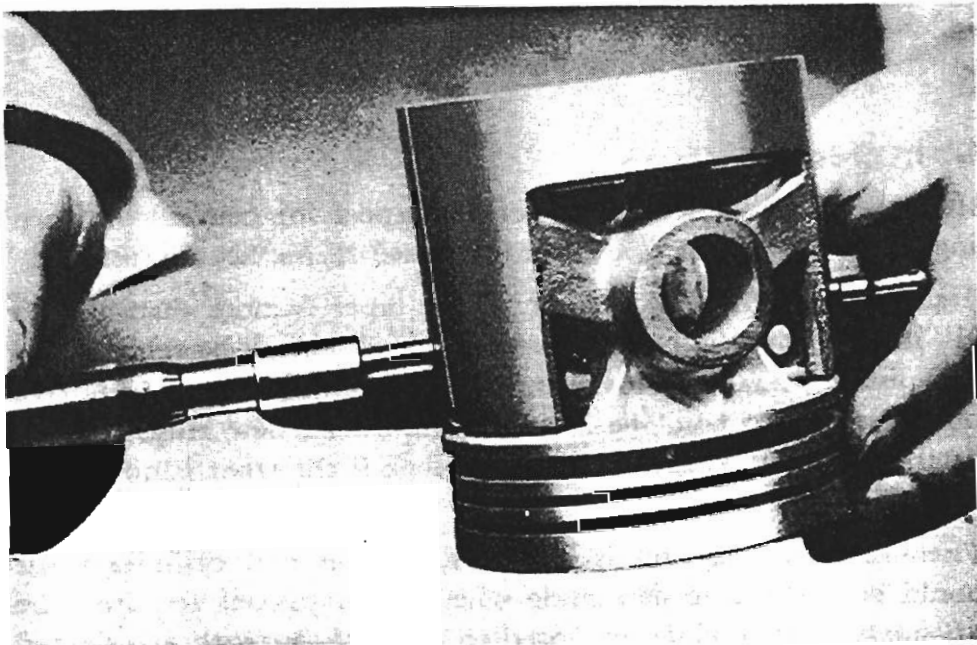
The Piston Skirt Should Be Measured at Right Angles to the Piston Pin Holes as Shown.
